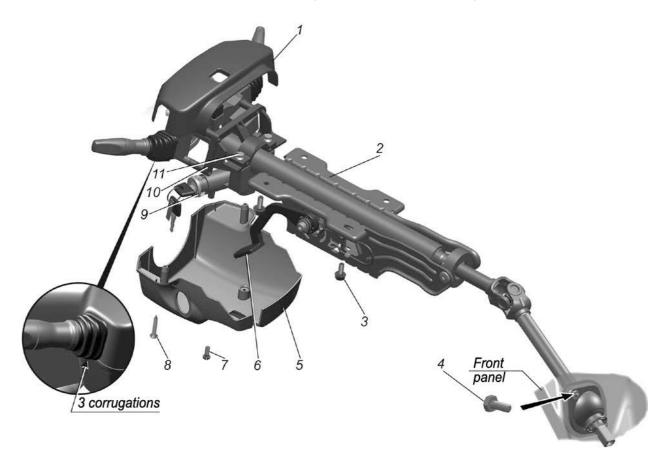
Steering column installation: 1 – upper casing; 2 – steering column; 3, 4 – bolts; 5 – lower casing; 6 – lever; 7, 8 – screws; 9 – instrument and starter switch; 10 – understeering switch base; 11 – bolt with detachable head
